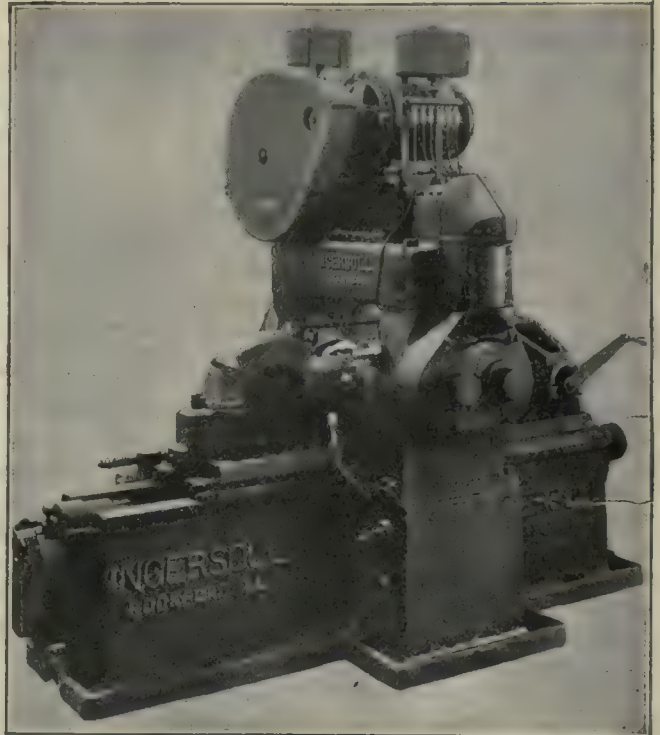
FOUR-SPINDLE RECIPROCATING-TABLE MILLING MACHINE
